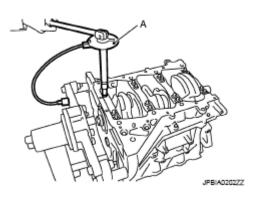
Checking Lower Cylinder Block Bolts Tightening Angle Using Angle Wrench Courtesy of NISSAN MOTOR CO., U.S.A.
